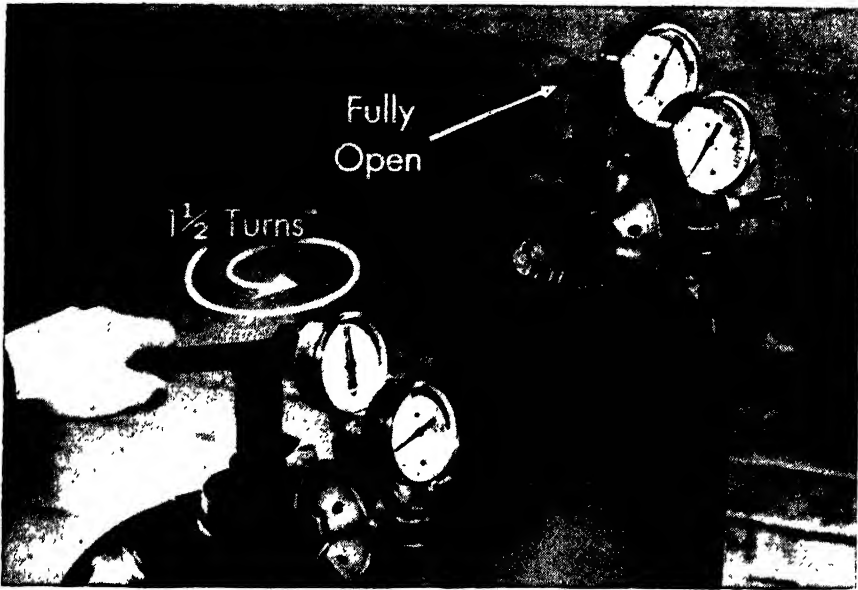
Open the cylinder valves slowly—the oxygen valve fully but the acetylene valve no more than $1\frac{1}{2}$ turns.
